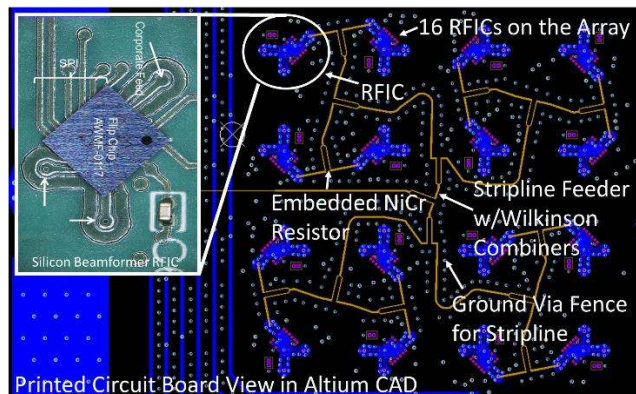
View of the Stripline Feeder in Altium CAD software for PCB design. View shows in blue (bottom metal layer), yellow (inner stripline layer). Inset picture shows flip-chip mounting of the beamformer RFIC.
